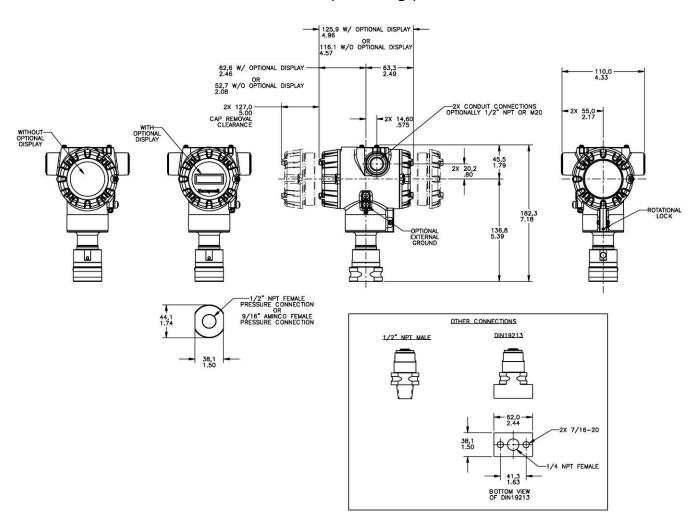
Typical mounting dimensions of STA72L, STA74L, & STA77L for reference
